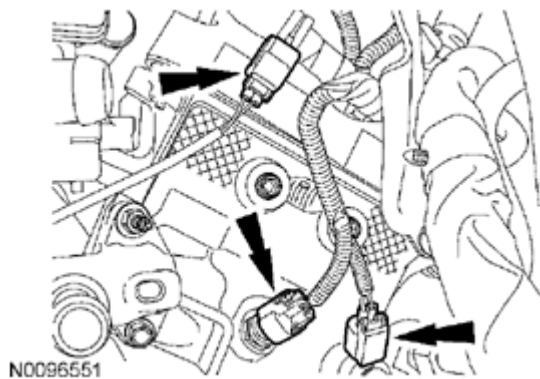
Locating Engine Block Knock Sensor Electrical Connector And Cylinder Head KS Electrical Connector
